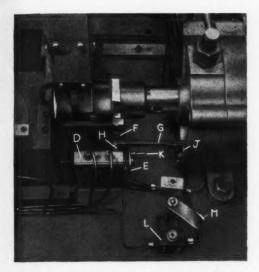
The thrust block, trips, and control valves at one side of the liner inserting machine can be clearly seen in this close-up view
